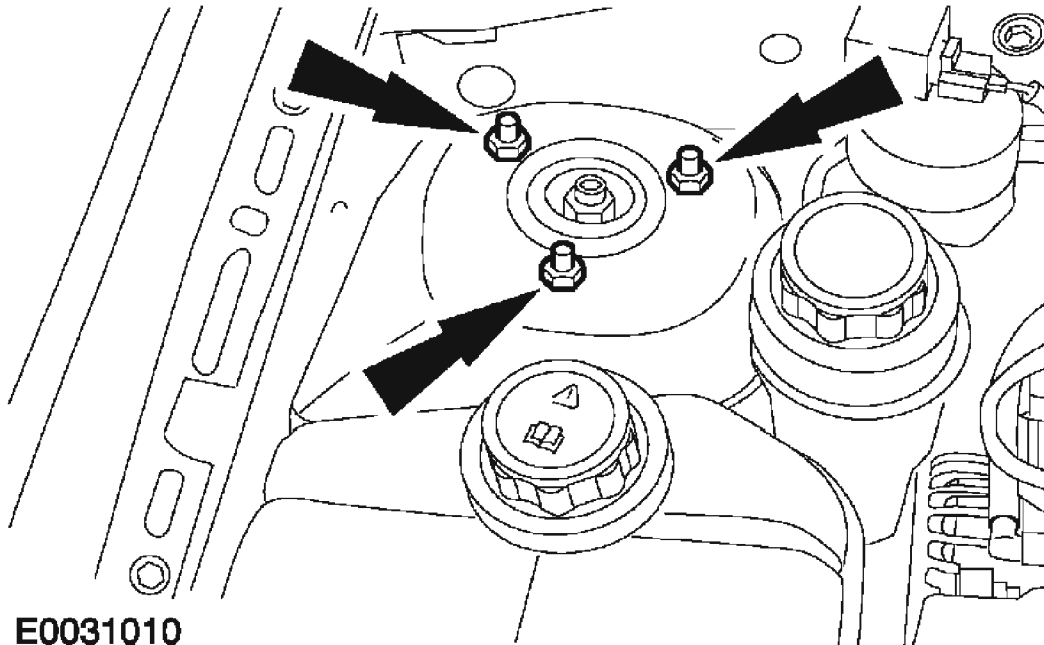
Loosening Strut And Spring Assembly Top Mount Nuts
